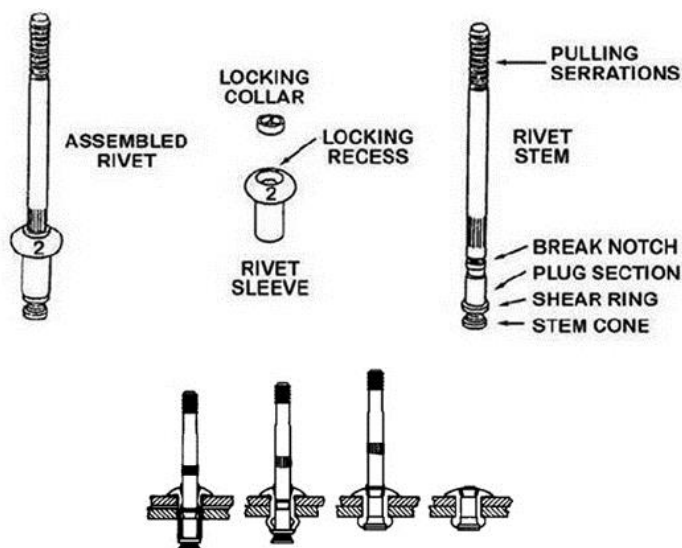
Bulbed-type mechanical-lock blind rivet (Cherrylock).
